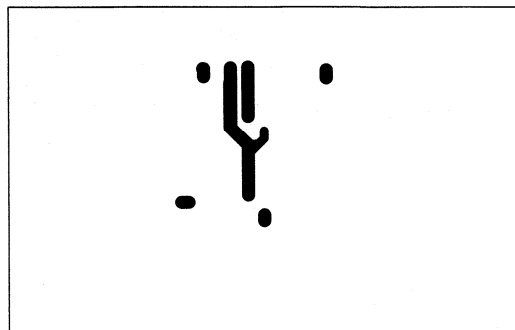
Surface-Mount PC Layout for Standard Step-Up Application (1x Scale, Bottom-Side Trace View)
